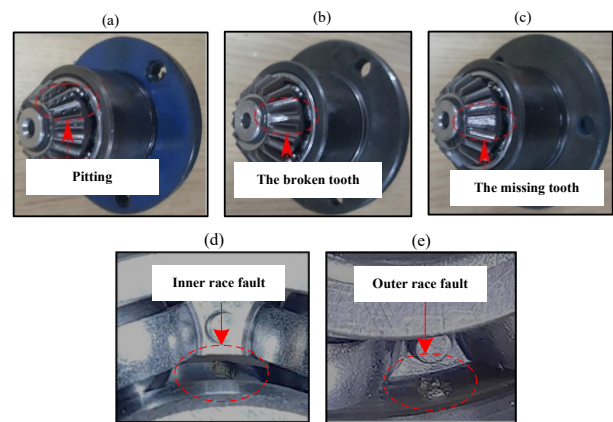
Faulty gears and bearings: (a) pitting in the driving tooth, (b) broken tooth in the driving tooth, (c) missing tooth in the driving tooth, (d) inner race fault, (e) outer race fault
